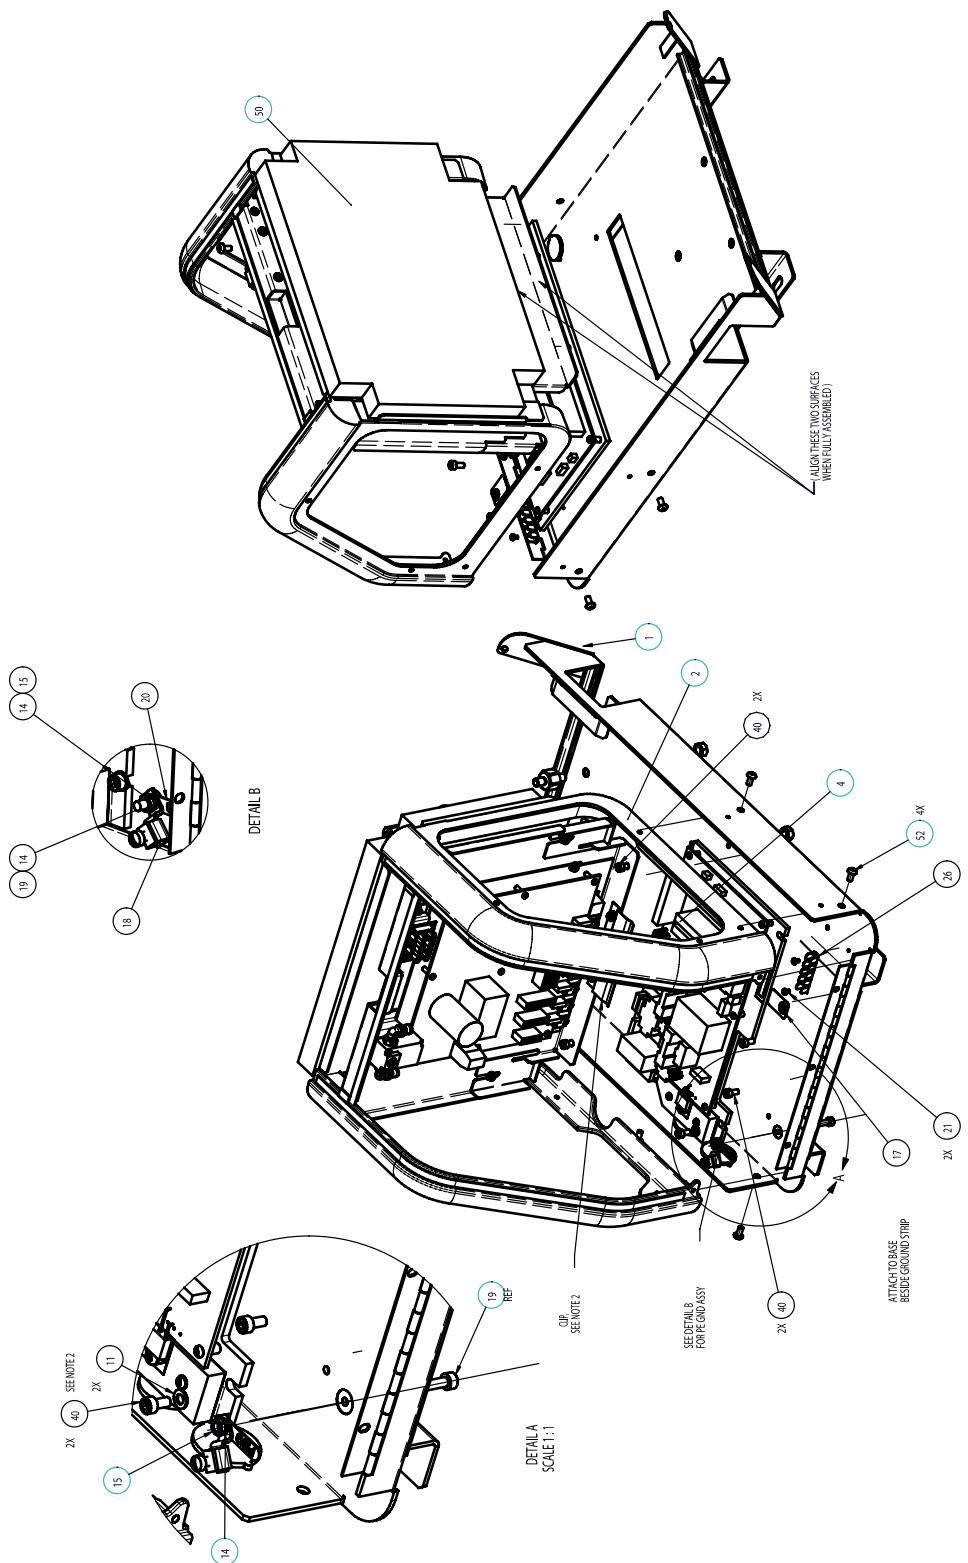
Chassis parts, 200–240V or 400/230 Y, M4/M6/M9 (1 of 2)
